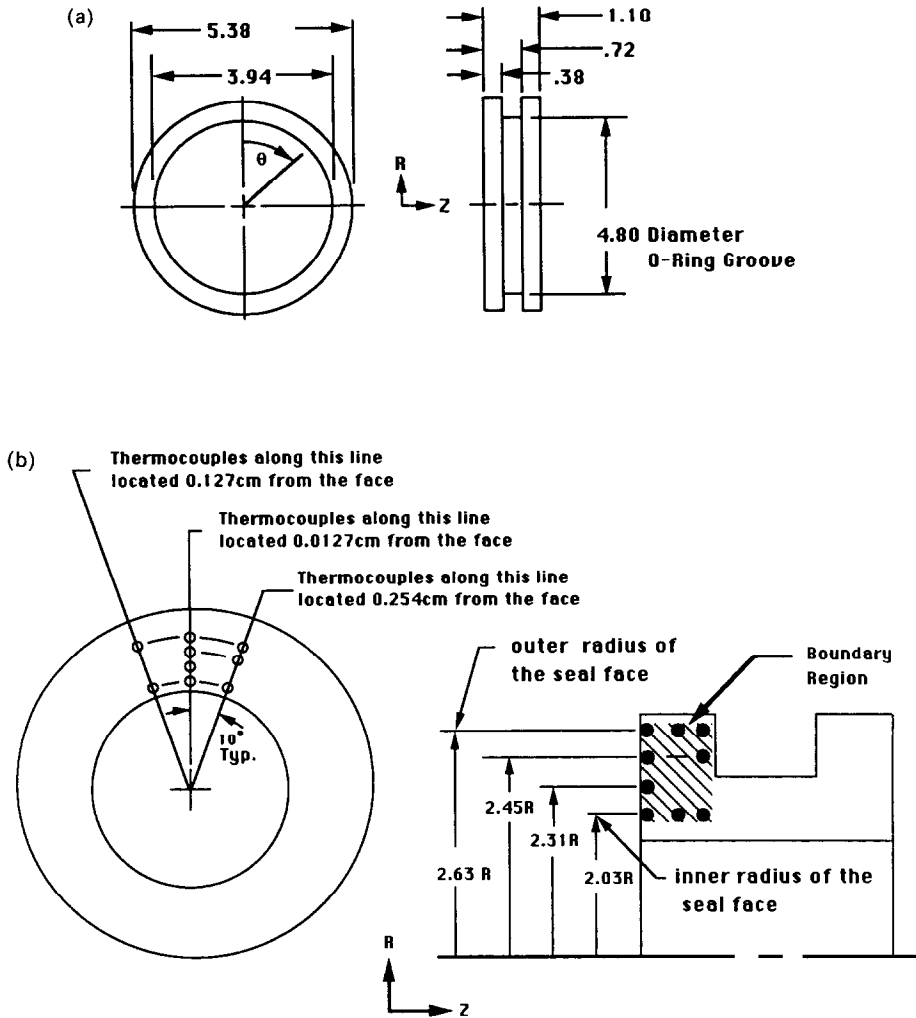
Basic seal dimensions (cm) and thermocouple locations for boundary measurements: (a) basic seal dimensions; (b) thermocouple locations.
